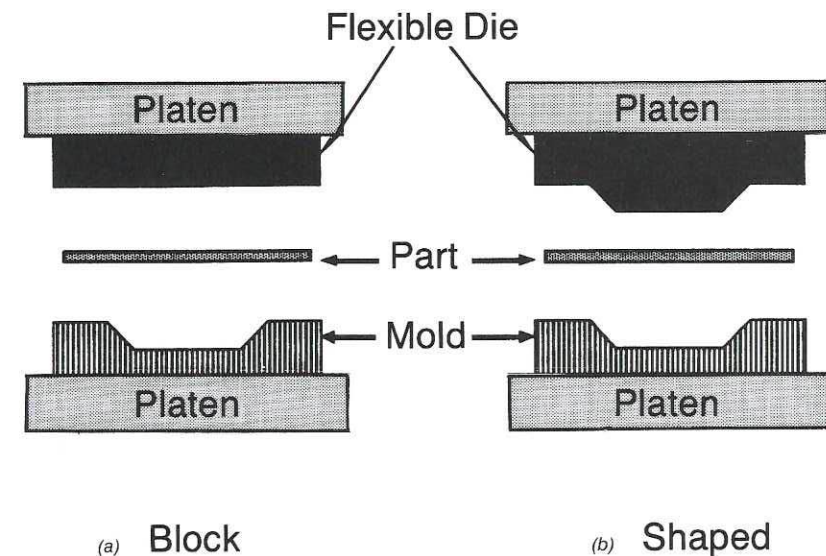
Rubber molding illustrating blocked and shaped rubber dies.
